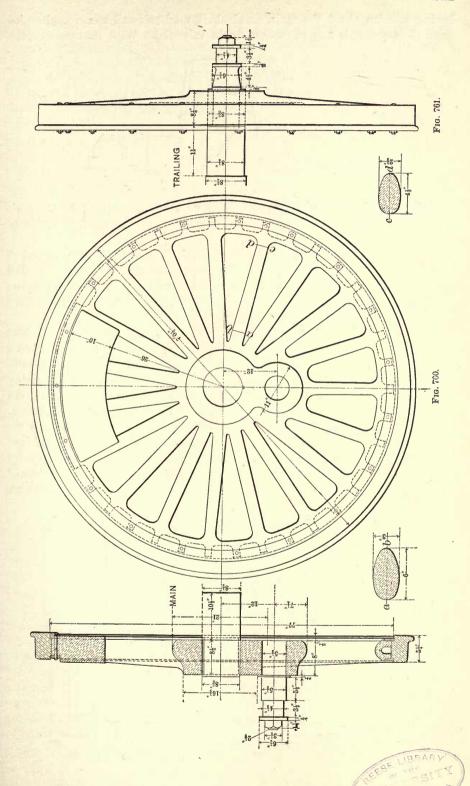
is an elevation and section of the driving wheel of a locomotive, with a counterbalance op-
